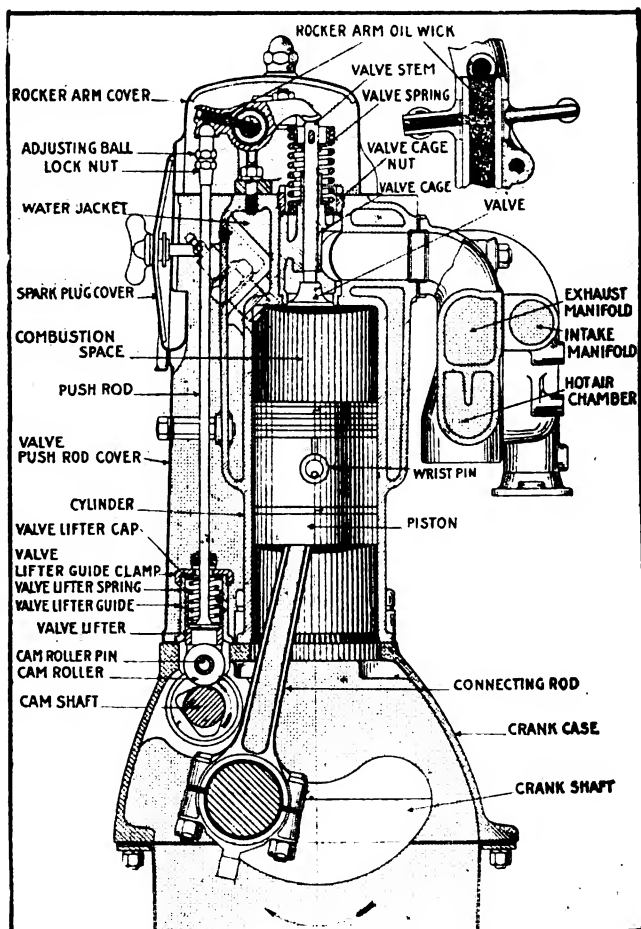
Cross section through engine showing overhead valves, double spring valve motion and other features
